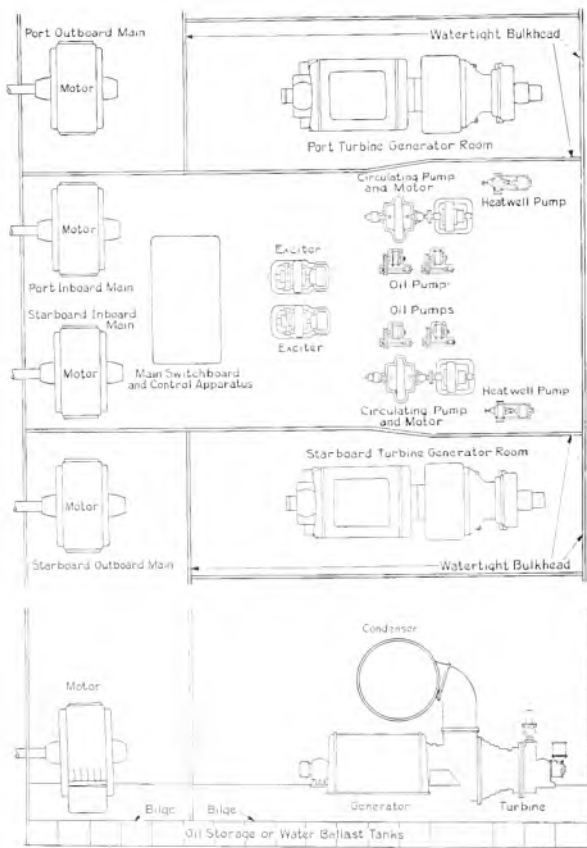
Plan and Elevation of the Engine Room Arrangement
